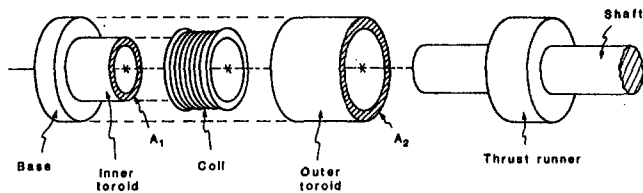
Exploded view of single-acting magnetic thrust bearing
